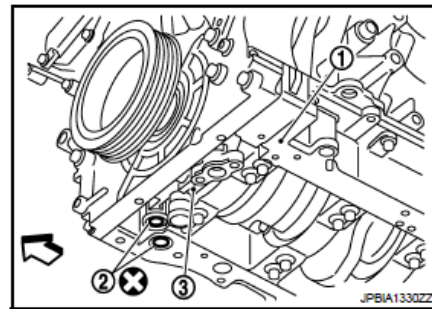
Identifying Lower Cylinder Block And Oil Pump
